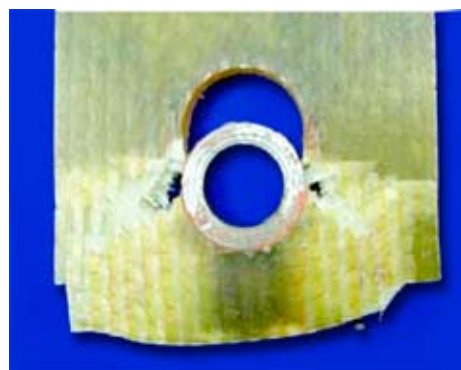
Typical failure for a composite/steel lap shear specimen with a steel insert.
